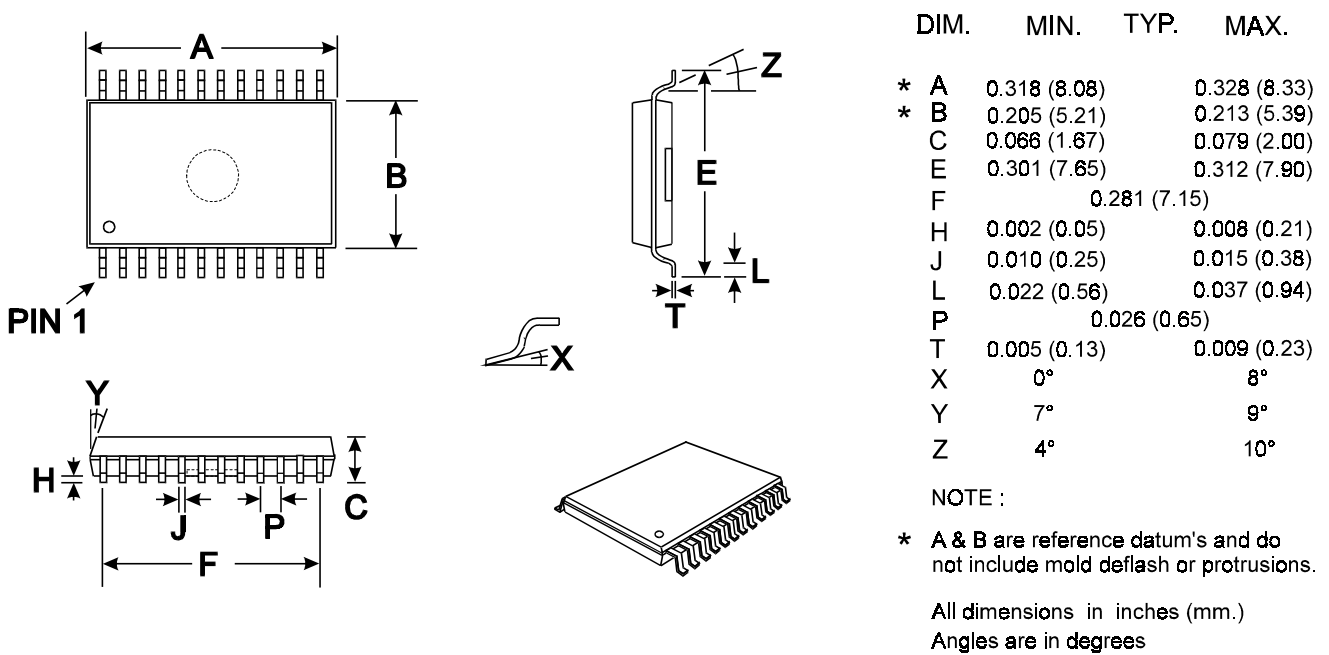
24-pin SSOP Mechanical Outline: Order as part no. CMX589AD5
